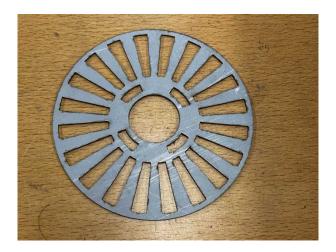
Metal disks made of nickel-coated steel, cut using CNC machining
